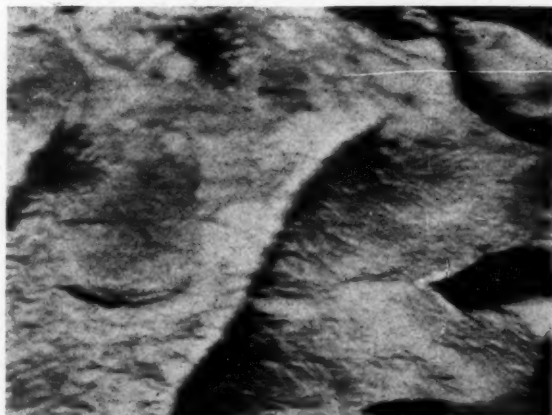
D—WHEEL NO. 16,470, 30 PER CENT COKE IRON IN MIXTURE
